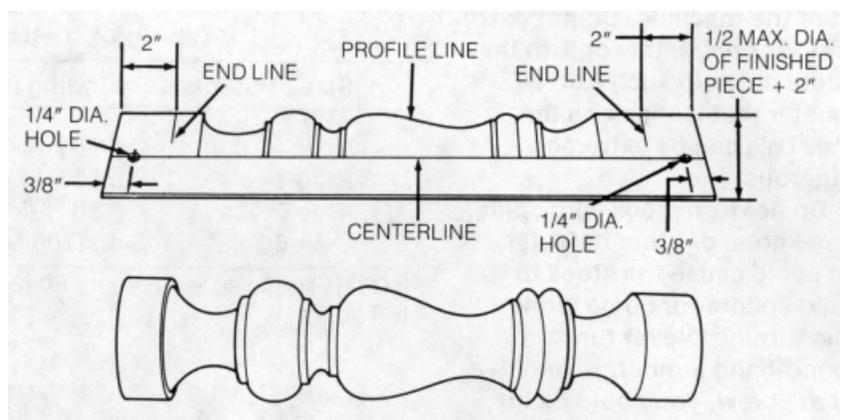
A typical spindle template showing important dimensions and its finished product.
